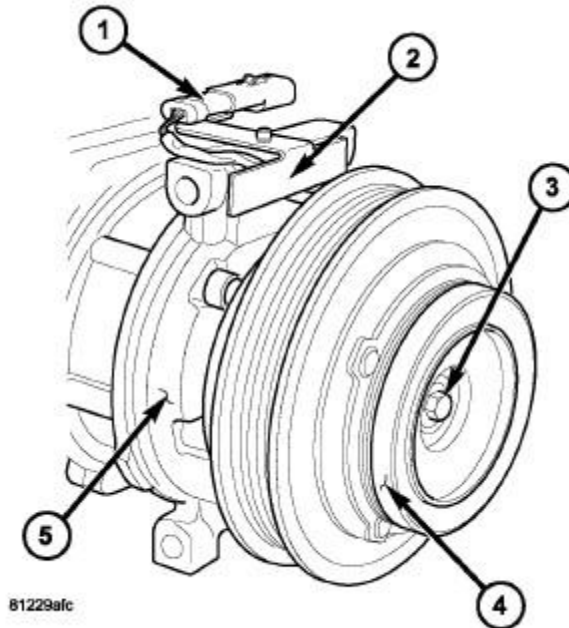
A/C Compressor, Field Coil Connectors, Bracket, Clutch Plate & Shaft Bolt
